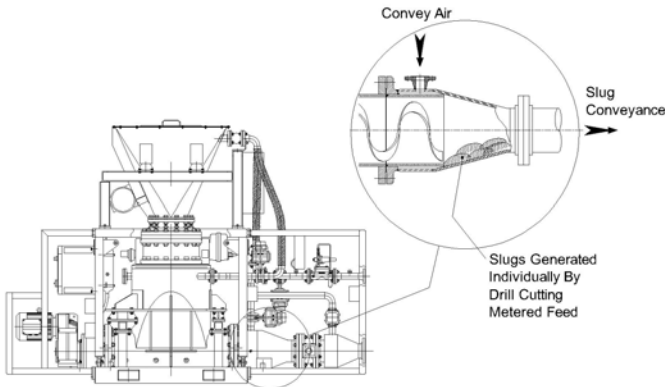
Air conveyor, detailing the metering screw and convey air interface (note: the slider tank discharge is identical to the above).
